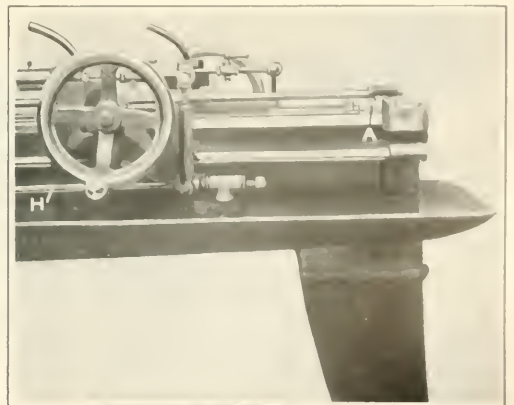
Tail End of Machine, showing Tailstock Buffer Springs
